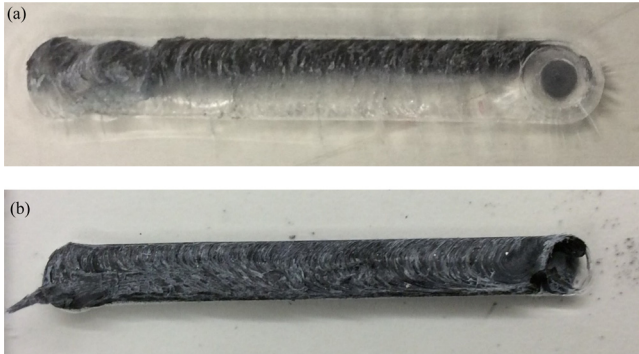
Differences between non-threaded probe (a) and threaded probe and (b) after the peel test.
